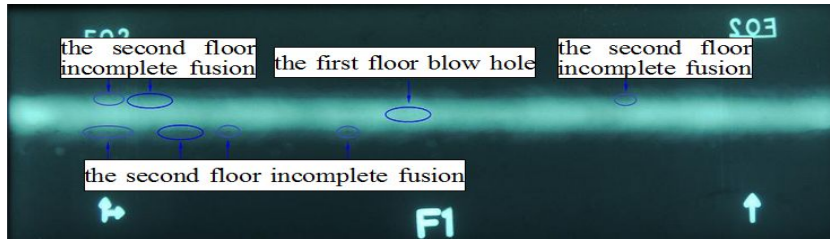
X-ray radiographic test film of shielding gas CO<sub>2</sub> 100% in no-preheating welding specimen
